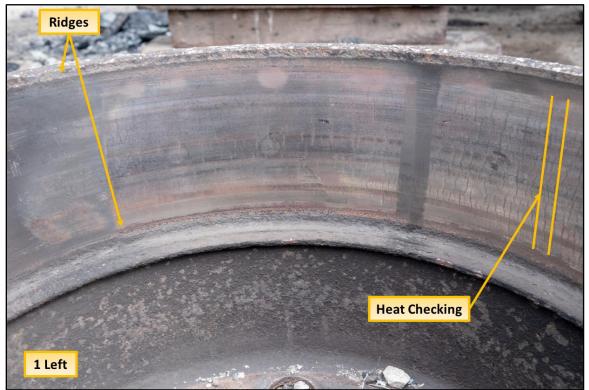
Inspected condition of the left friction surface of the brake drum on axle 1.
